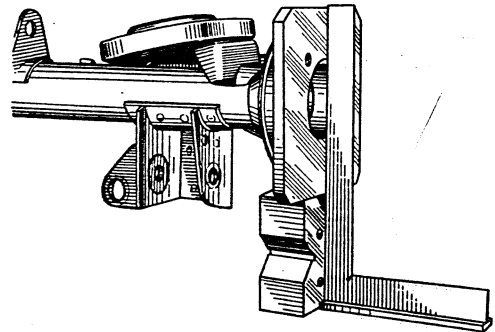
Checking the Rear Axle Beam for Vertical Deformations with Angle Gauge Applied to Outer Face of Flange A.70172
